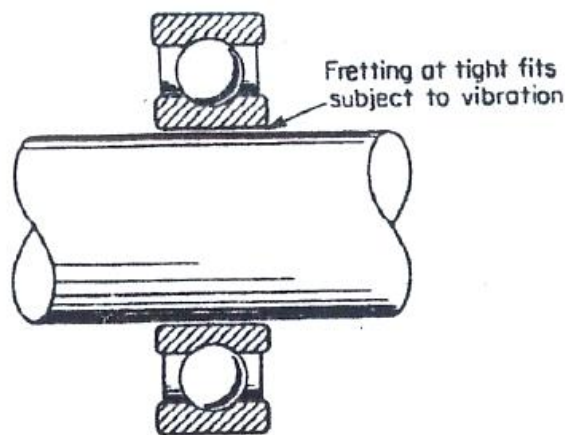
Example of typical fretting corrosion location [11].
